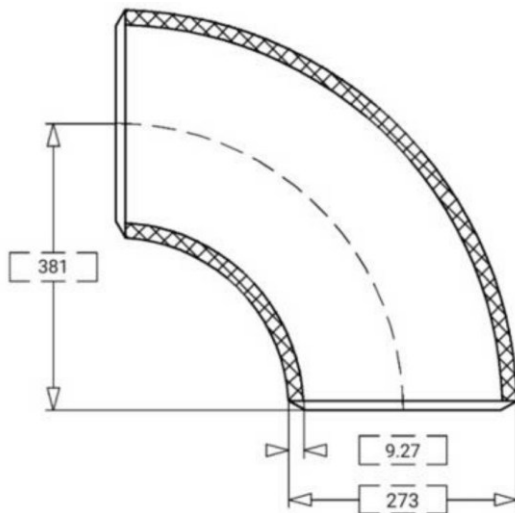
Dimension of 90° Long Radius API 5L Elbow
